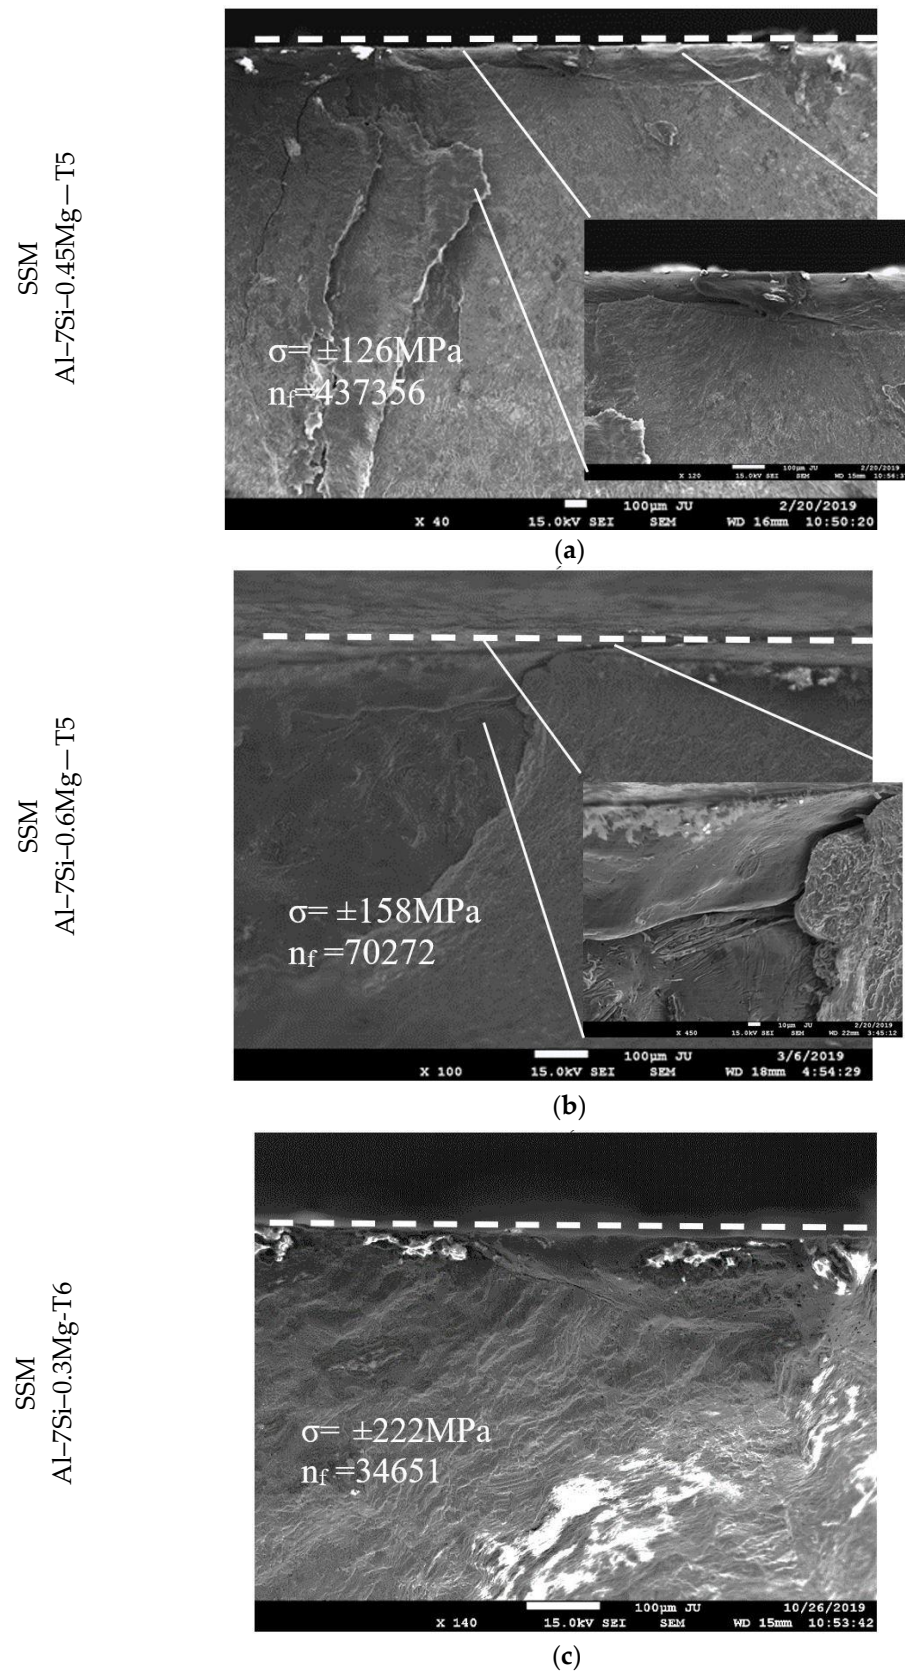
T-SEM micrographs showing the fracture surface of the (a) SSM Al-7Si-0.45Mg casting in the T5 condition, (b) SSM Al-7Si-0.6Mg casting in the T5, and (c) SSM Al-7Si-0.3Mg casting in the T6 conditions. The dashed line shows the casting surface position in the image.
